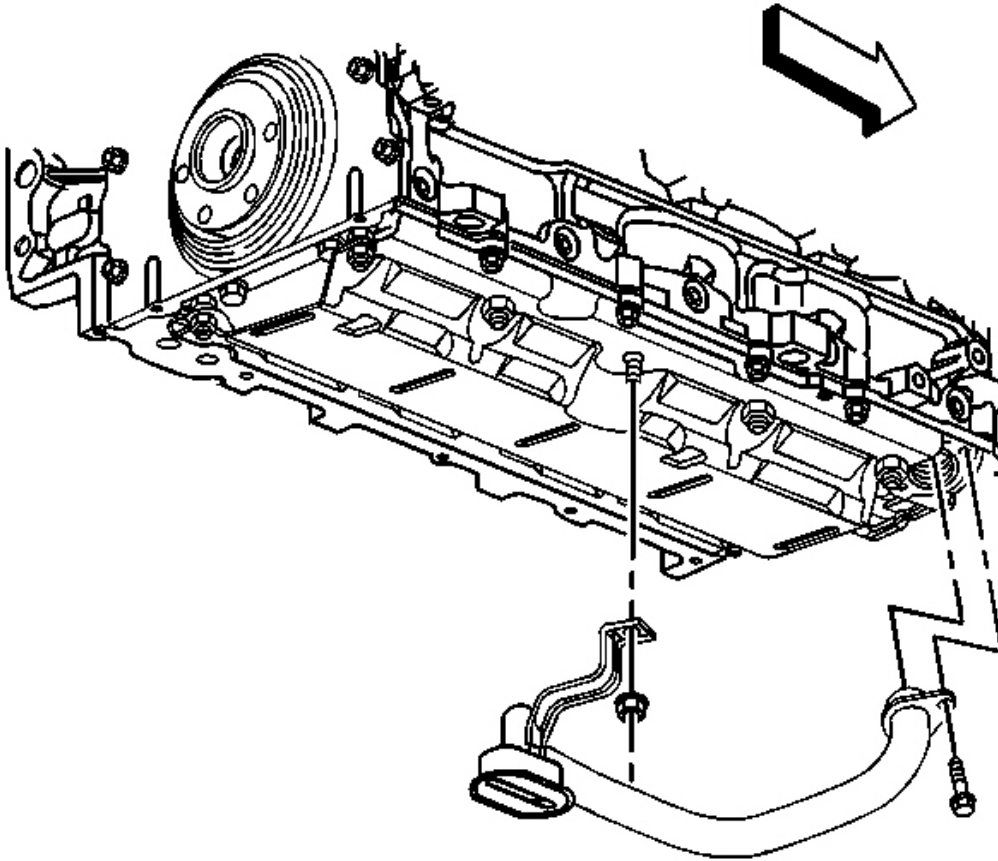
O-Ring Seal, Oil Pump Screen & Bolt
